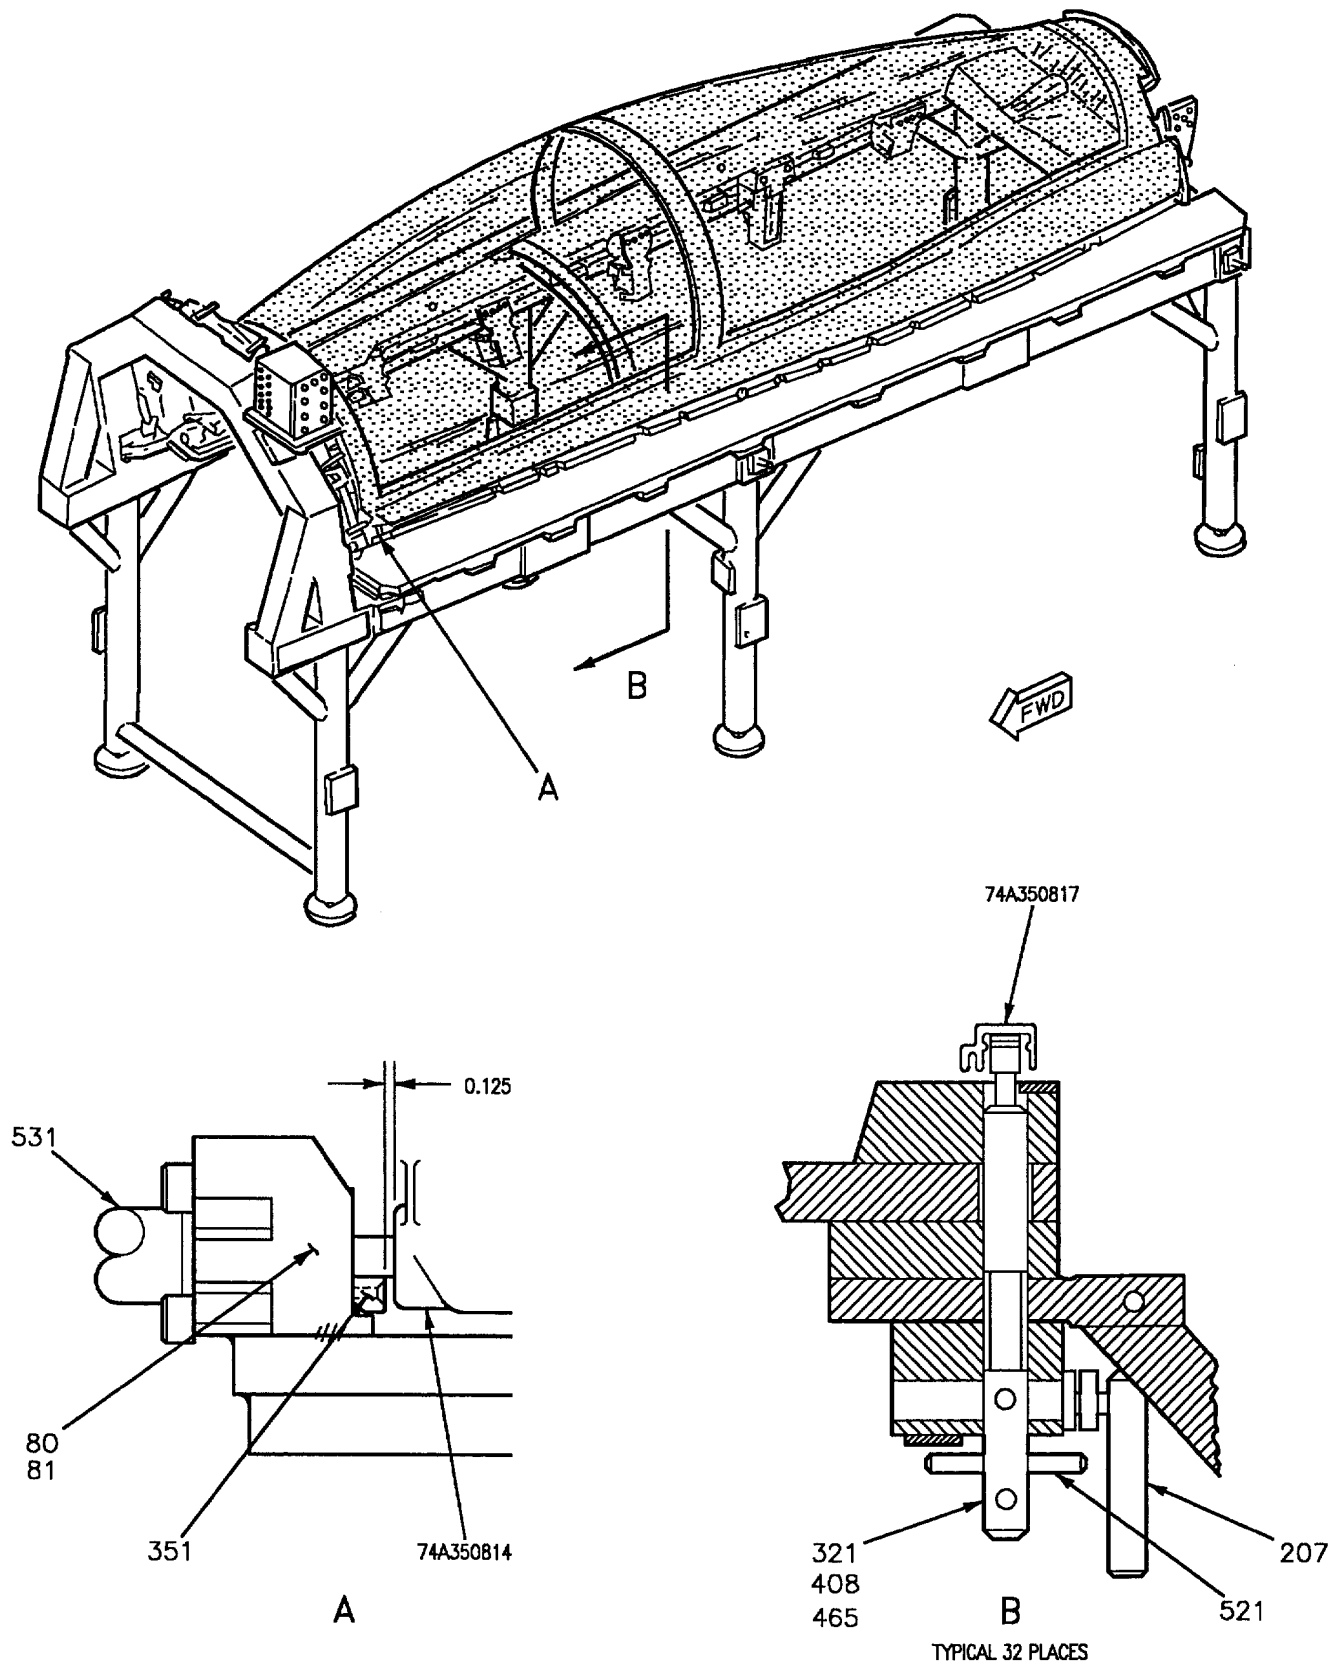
Inspection - Latch No. 1 (Sheet 1)
